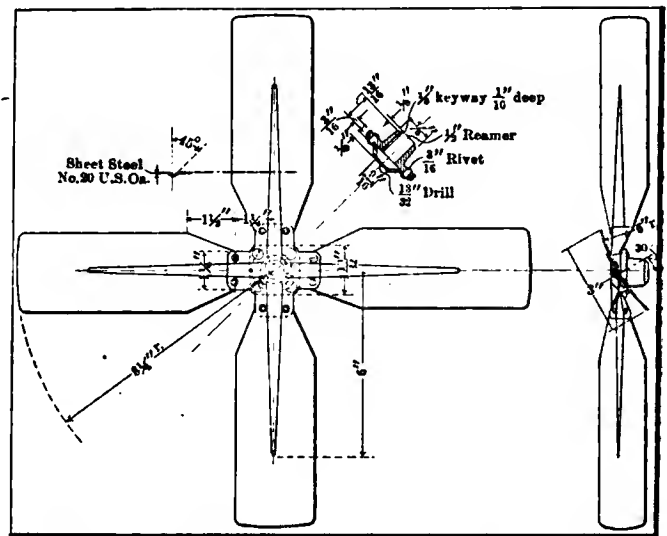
Premier fan, with four blades of pressed steel, ribbed and beaded for strength
